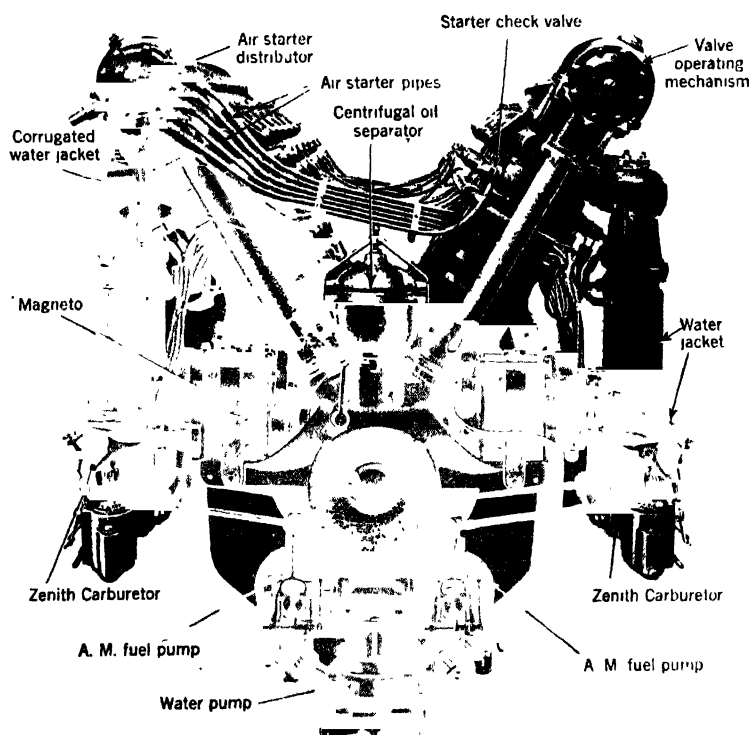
Accessory Drive End of Renault Aviation Motor Showing Centrifugal Oil Separator and Mounting of Air Starter Distributor.
